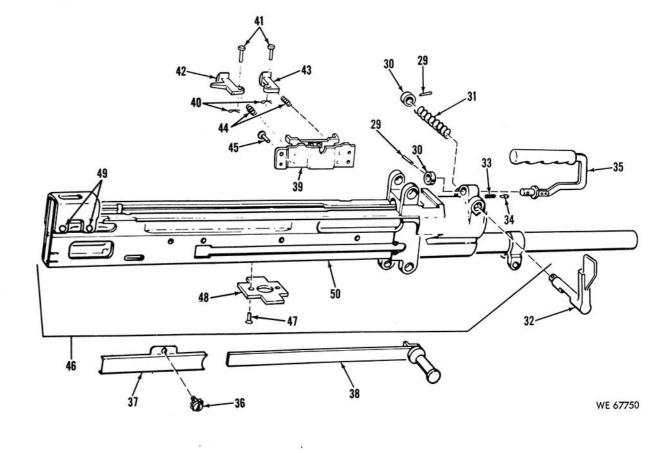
7.62 Millimeter Machine Gun M60D—Partially Exploded View (Sheet 2. 2).
